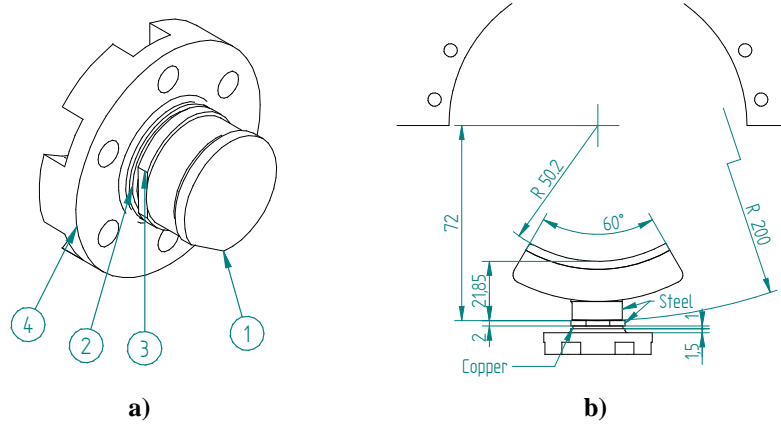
(a) 3D drawing of the pivot and (b) drawing of the pad and pivot (nominal dimension).
